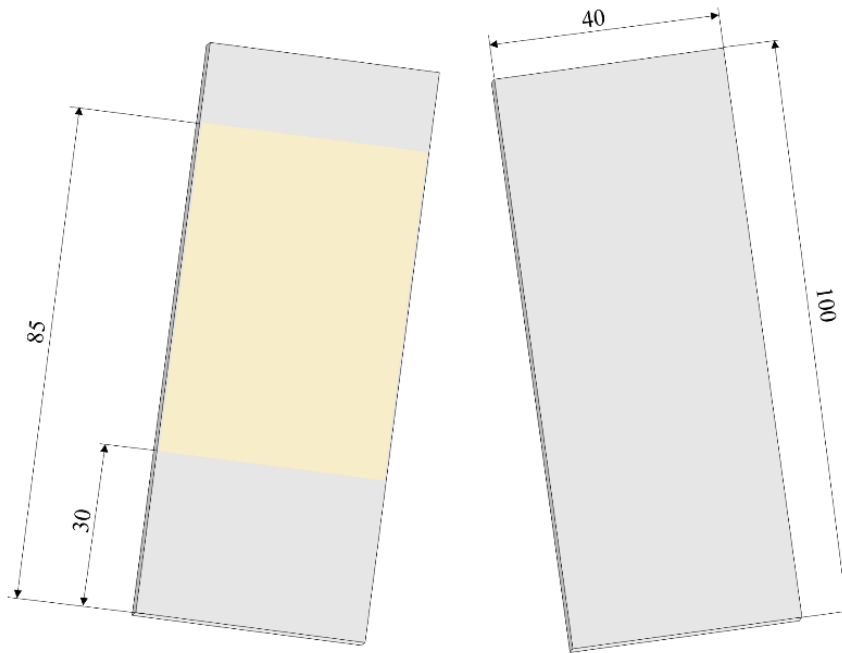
Front and backside of plate including dimensions. Plate dimensions were 100 x 40 mm with a coated area at the frontside (highlighted in ocher) with a dimension of 55 x 38 mm.
